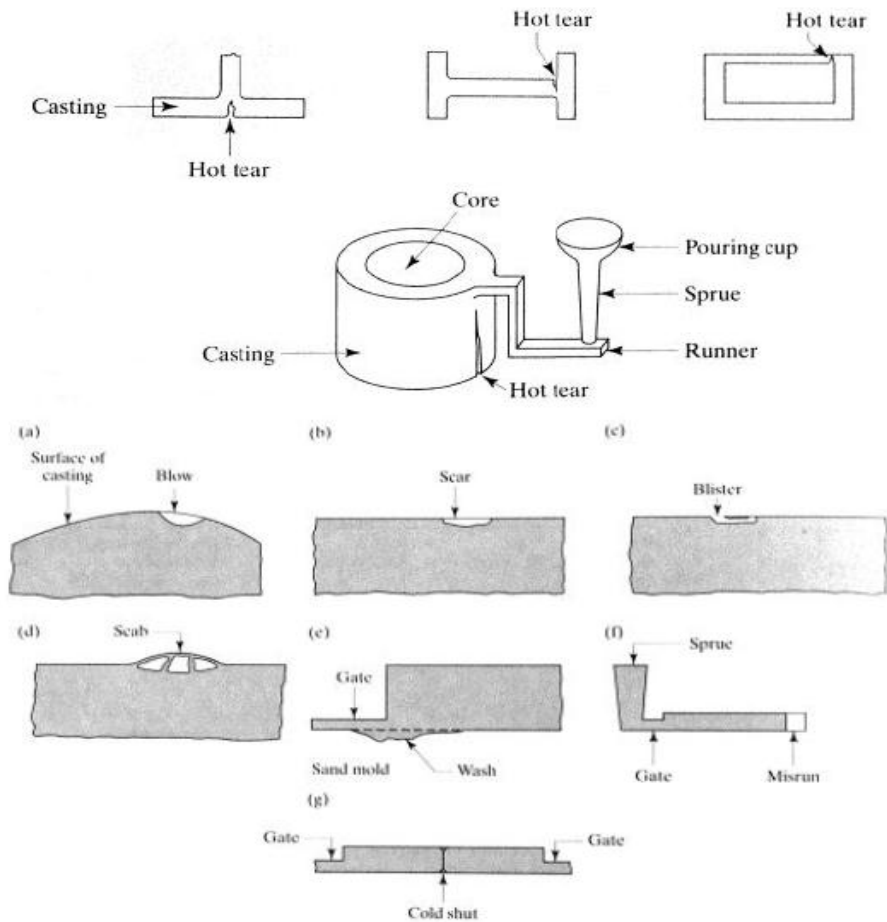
Typical defects in casting [source: Kalpakjian & Schmid]
